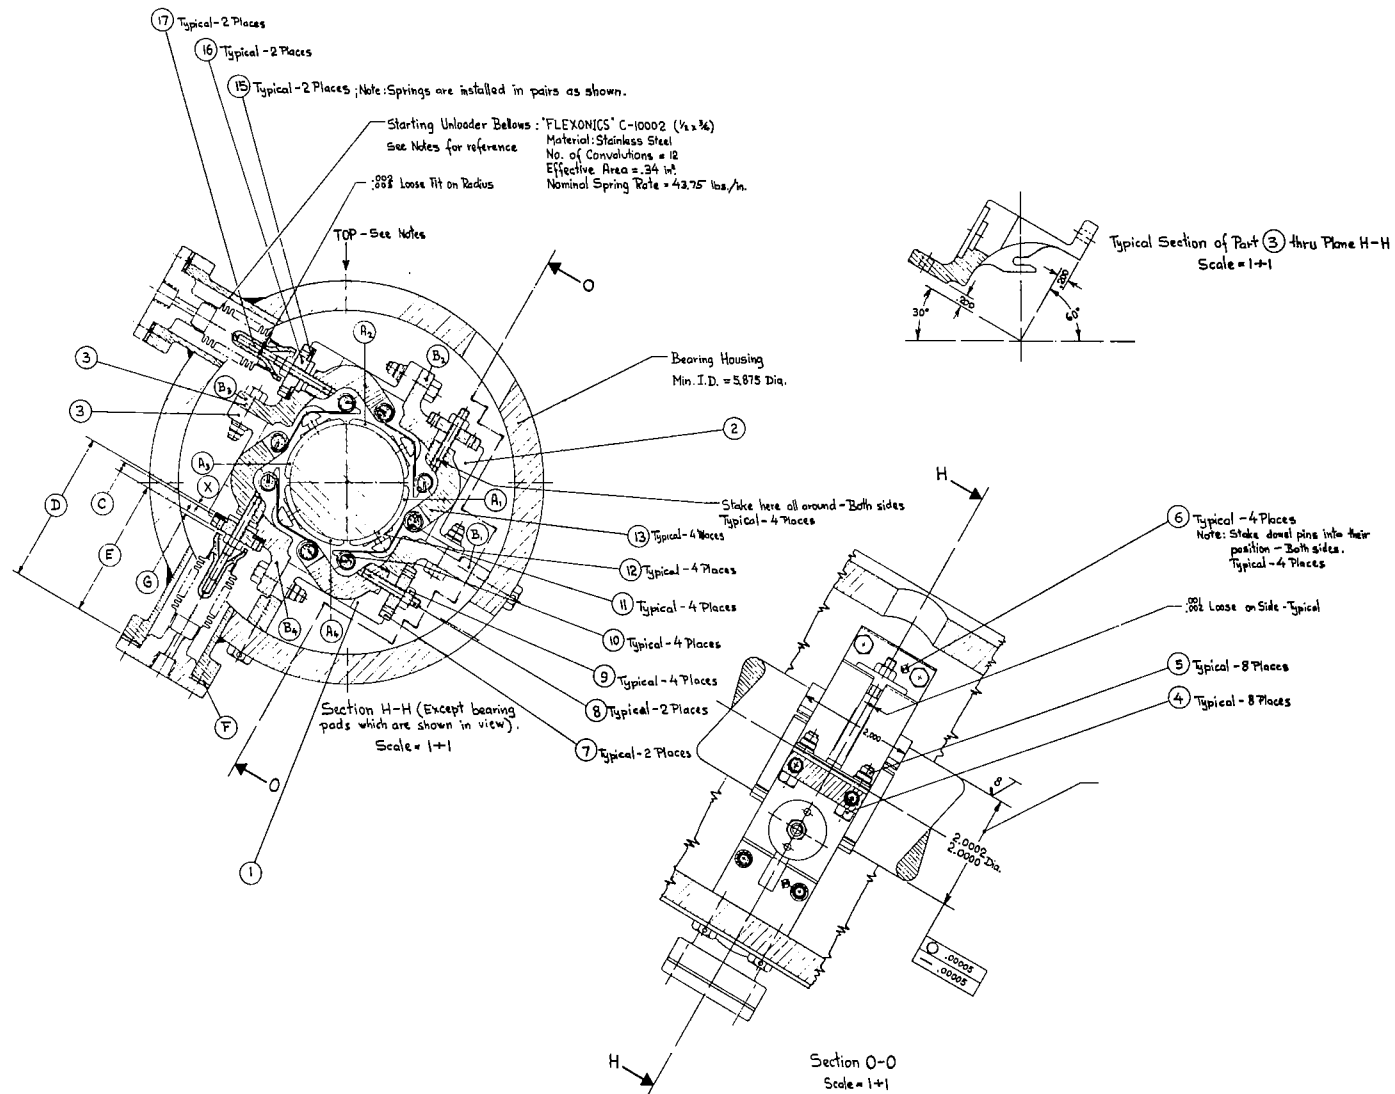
Detailed Design of the Foil-Supported, Tilting-Pad Journal Bearing
